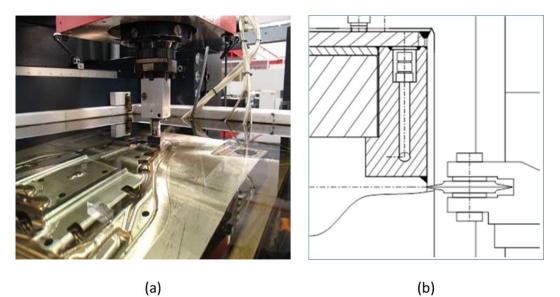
Examples of Various Cutting Approaches: (a) Electrical Discharge Machining and (b) Cutting Wheel
